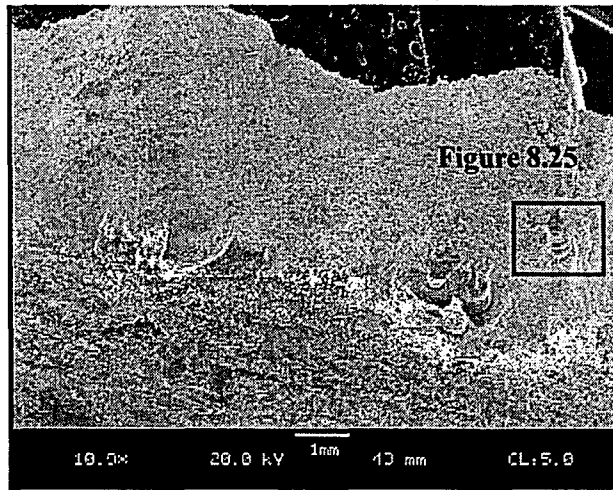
SEM Image (10x) of Right Side Fracture Surface—T-4
